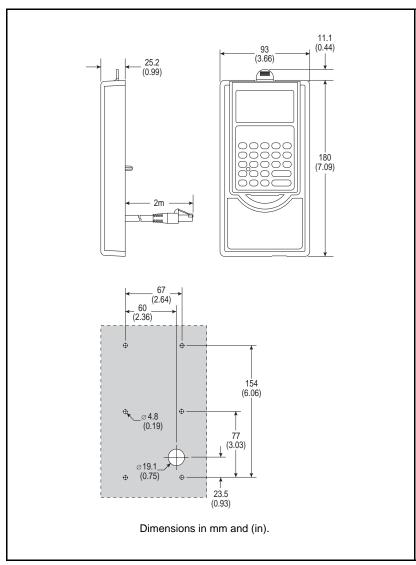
NEMA Type 1 Bezel (M/N MDBZL-N1): Dimensions
